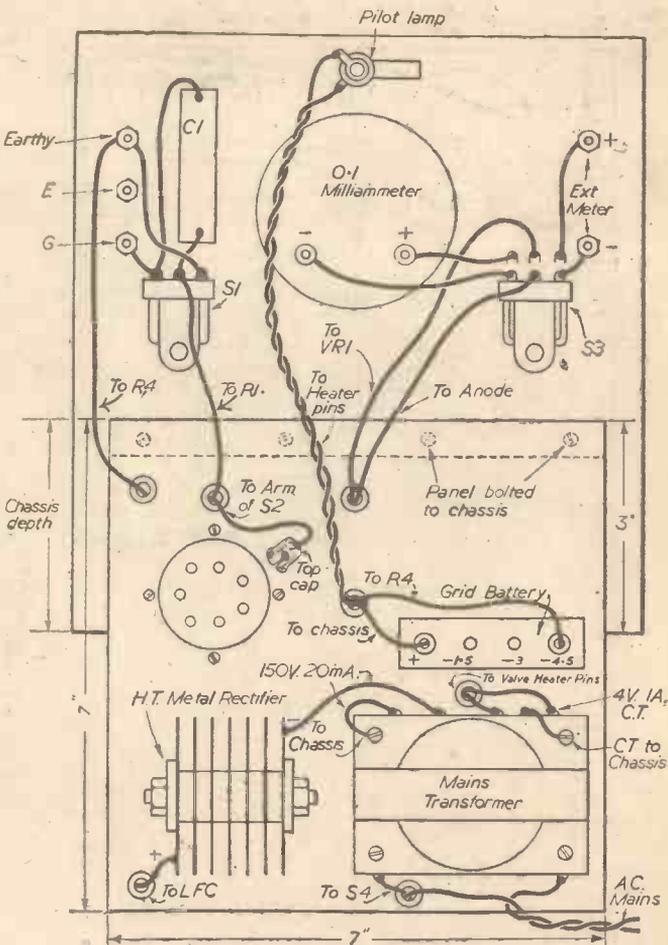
Panel and top of chassis layout and wiring diagram.
